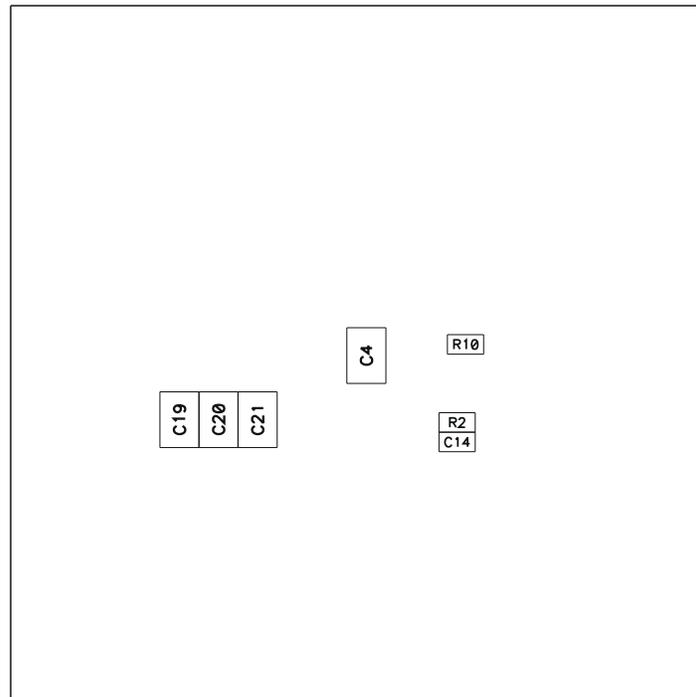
TPS56121EVM-601 Bottom Assembly Drawing (bottom view)
